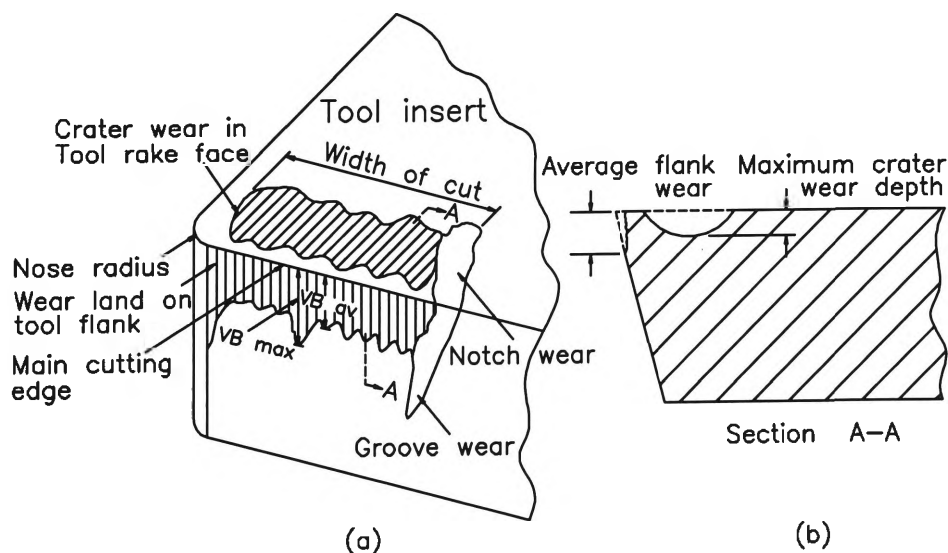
Geometry of tool wear. (a) Wear zones on cutting tools. (b) Tool wear parameters.
